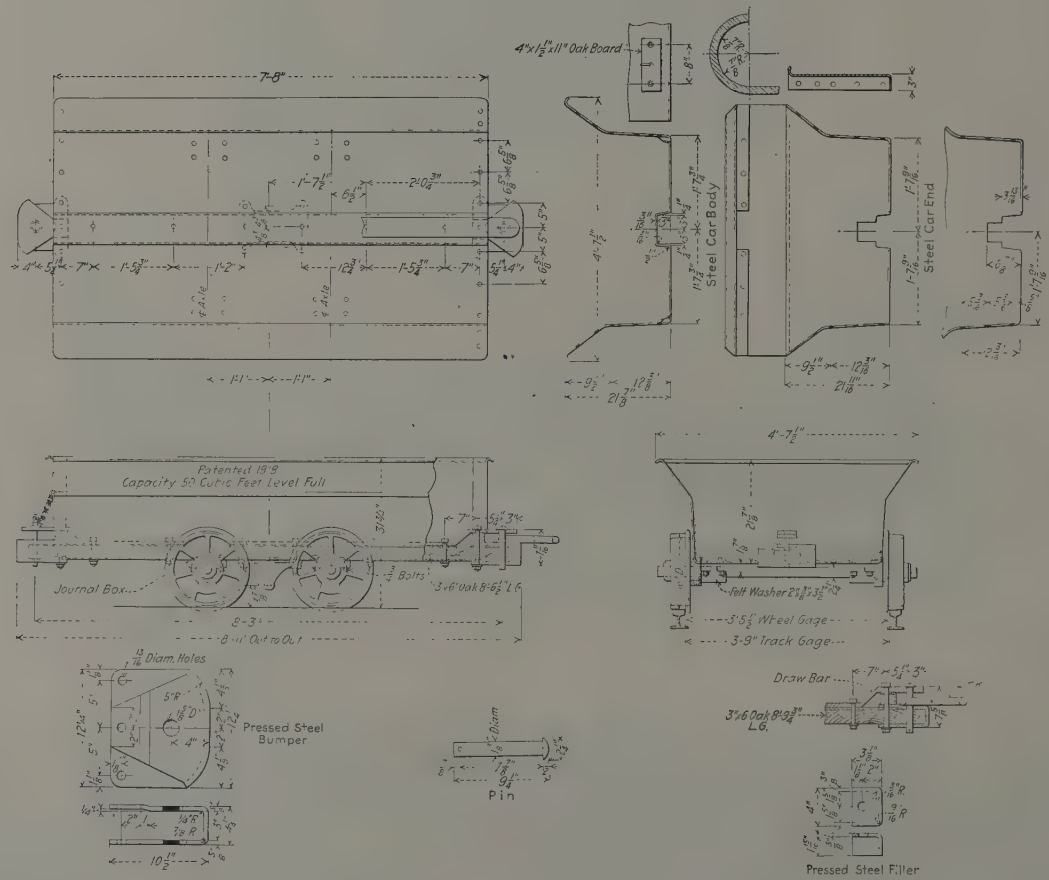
Arrangement and Details of Mine Car Shown in Fig. 438.
